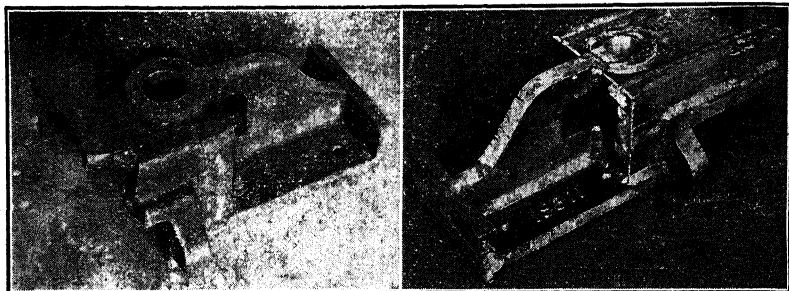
When the cast steel locomotive draw head shown on the left broke, it was replaced with the fabricated steel draw head shown on the right. The welded steel part was built complete in 16 hours.
